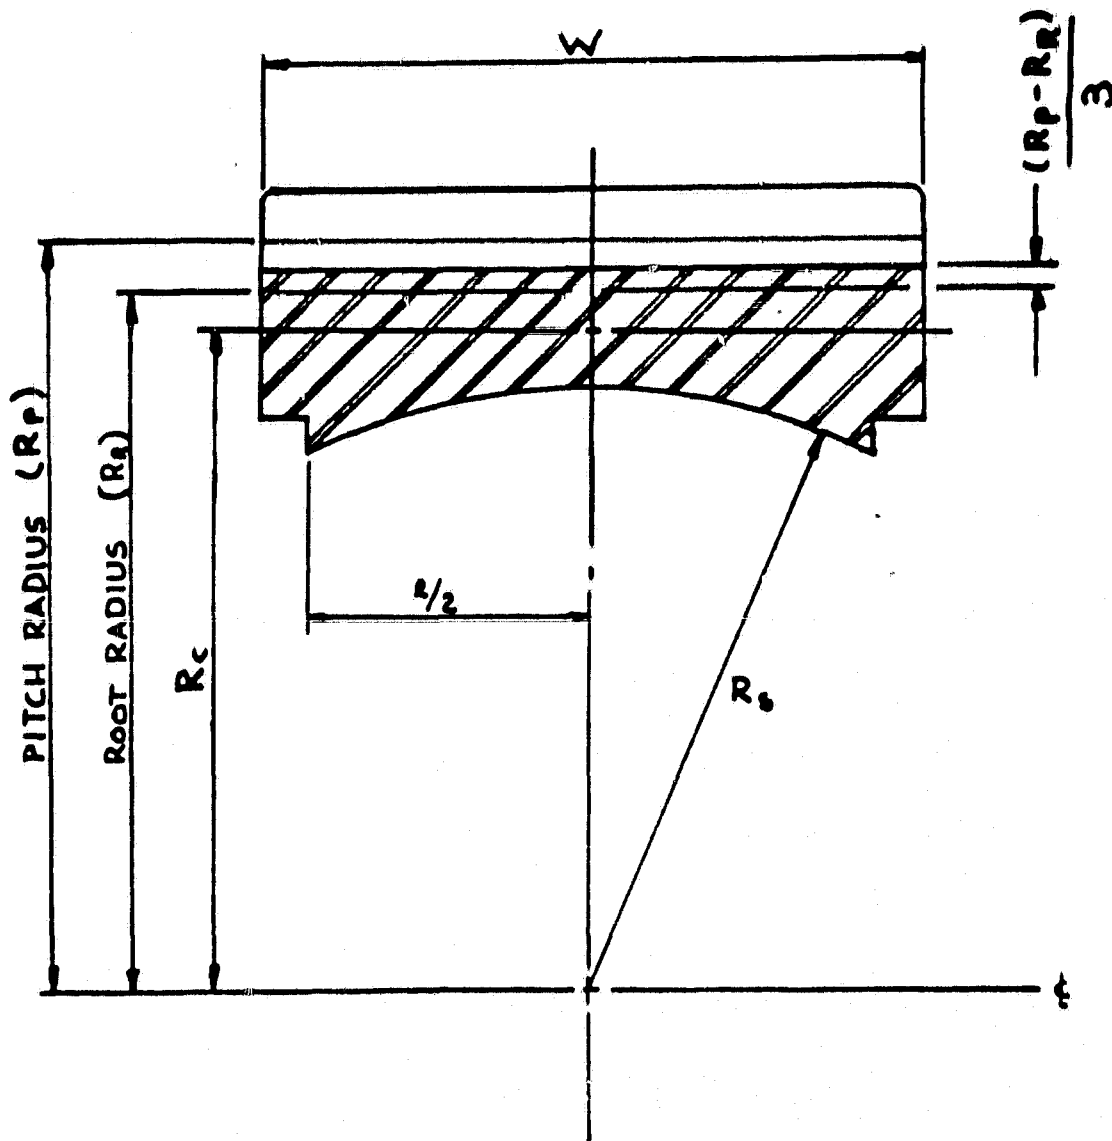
PLANET GEAR OUTER RING CROSS SECTION
